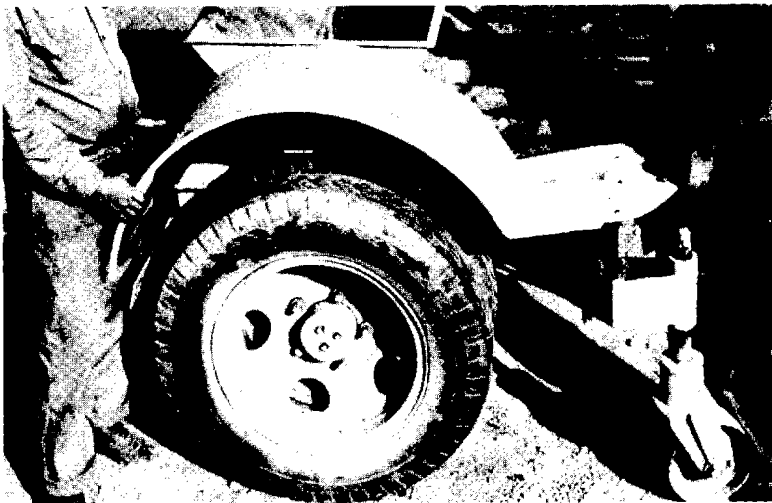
Progressive Assembly of the Cement Spreader. (Continued).
